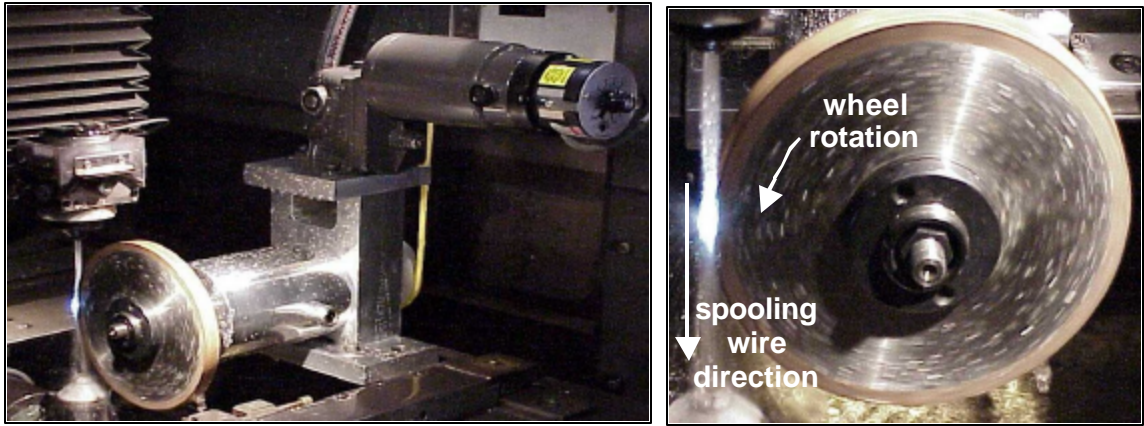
Spindle/Machine Setup for MBD Wheel Profiling
